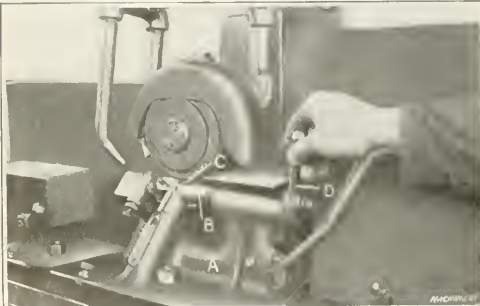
Device for truing Face and Sides of Grinding Wheel for Keyshaft Grinding on Bath Machine—Device set for truing Radius
